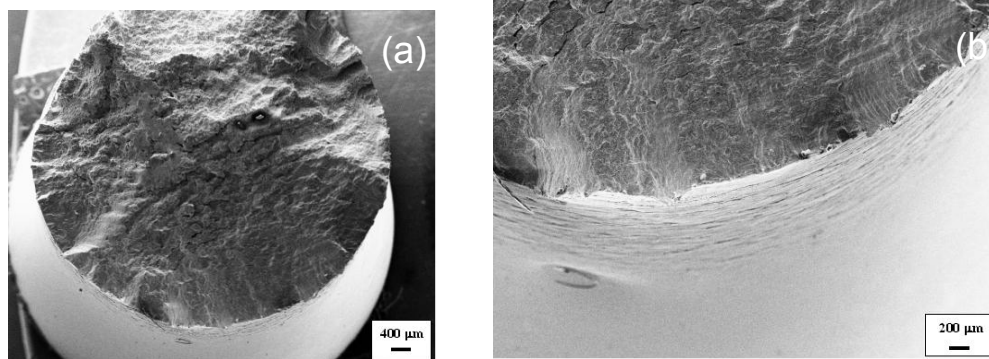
Macroscopic aspect of the fracture surface of the nitrided AISI 316 steel test specimen stress-tested at 6200 MPa and fractured after 6,800 cycles: (a) fracture surface showing ratchet marks, demonstrating the nucleation of multiple cracks occurred in the material, which, upon joining, formed steps in the fracture surface; (b) overview of the lateral surface and a group of nucleation sites, with presence of microcracks on the surface of the nitrided layer.
